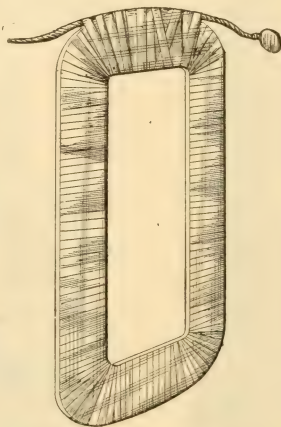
MANUFACTURE OF PANCAKE COILS.
